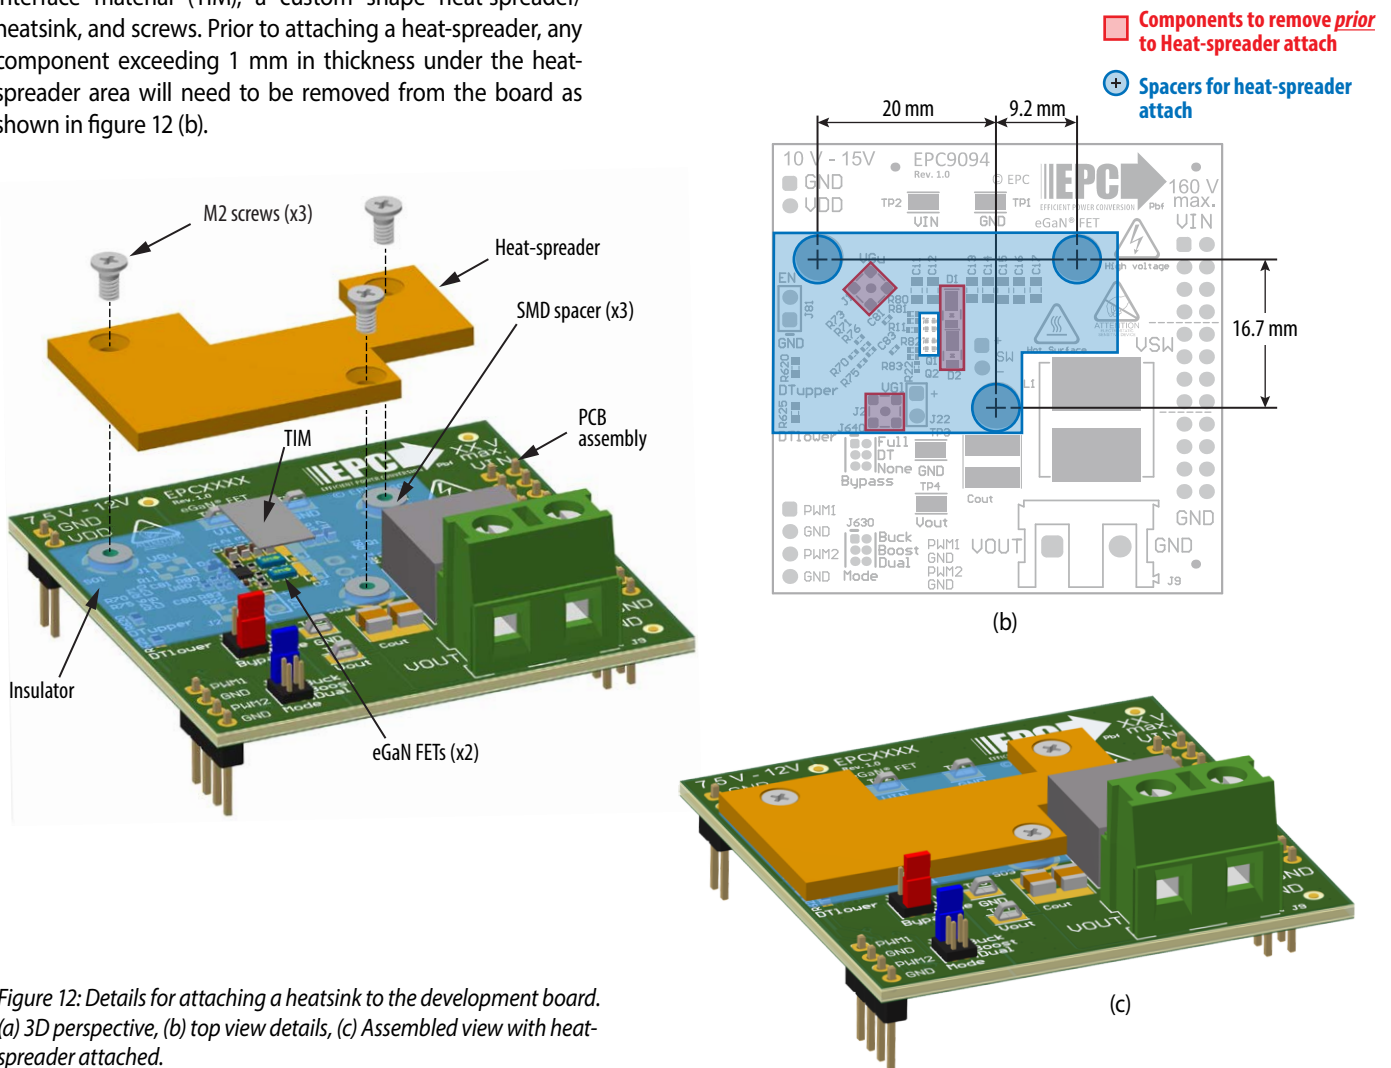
Details for attaching a heatsink to the development board. (a) 3D perspective, (b) top view details, (c) Assembled view with heat-spreader attached.
